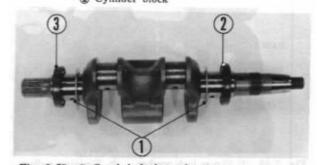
① Crankshaft thrust bearings 2 Oil seal A 3 Oil seal B
